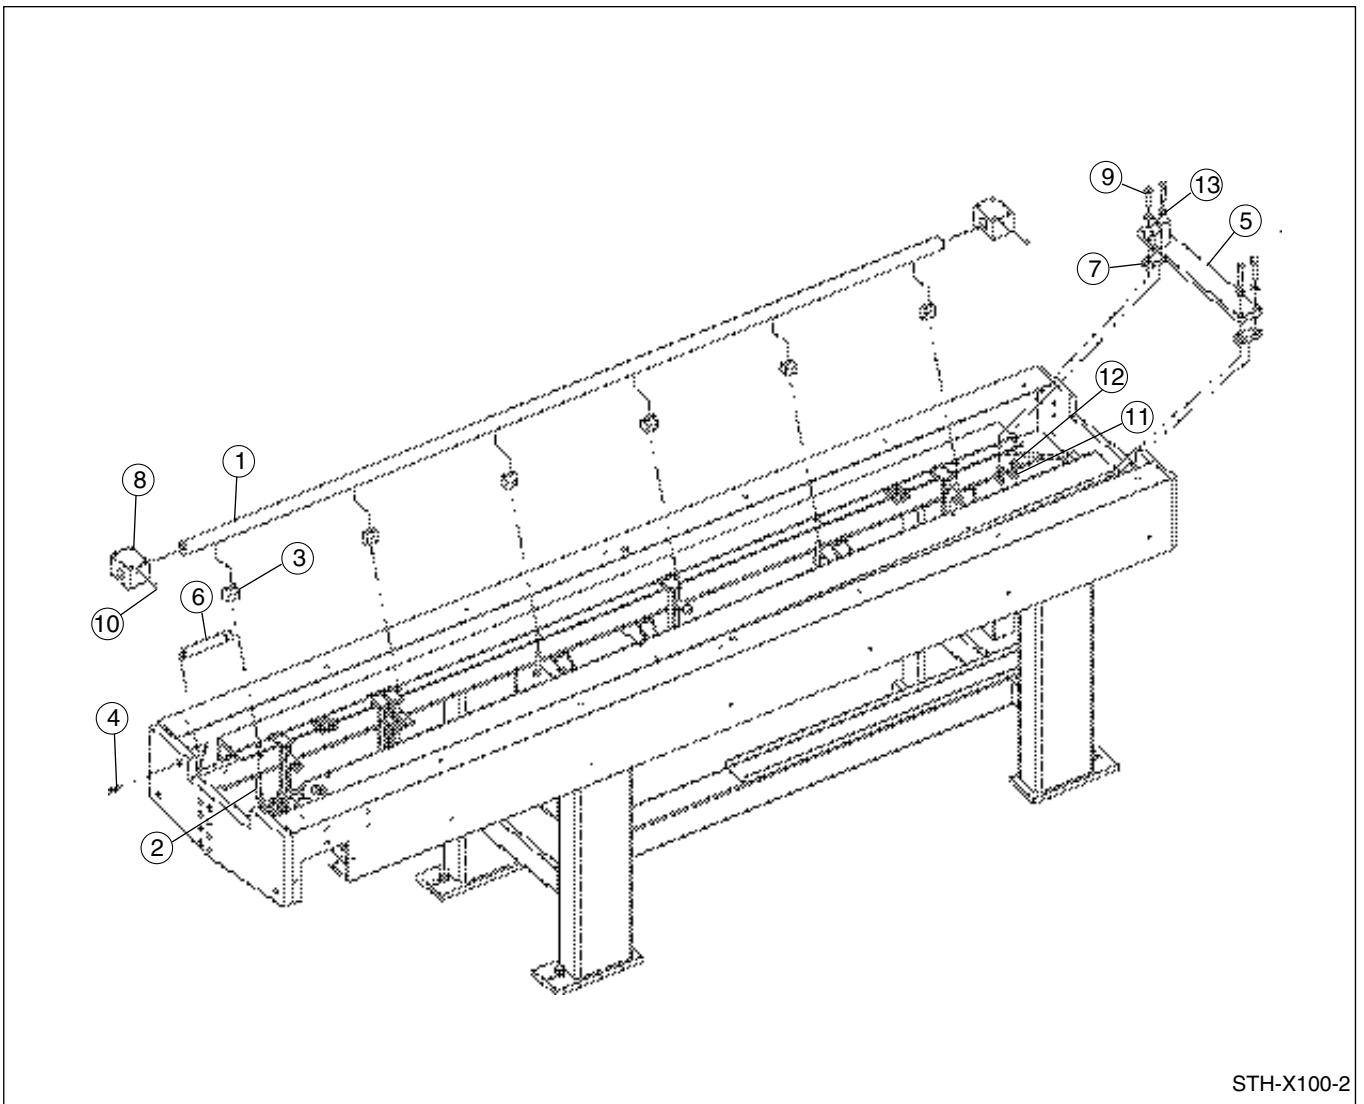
FIGURE A - TUBE HONE MACHINE BASE ASSEMBLY (1 of 8)
